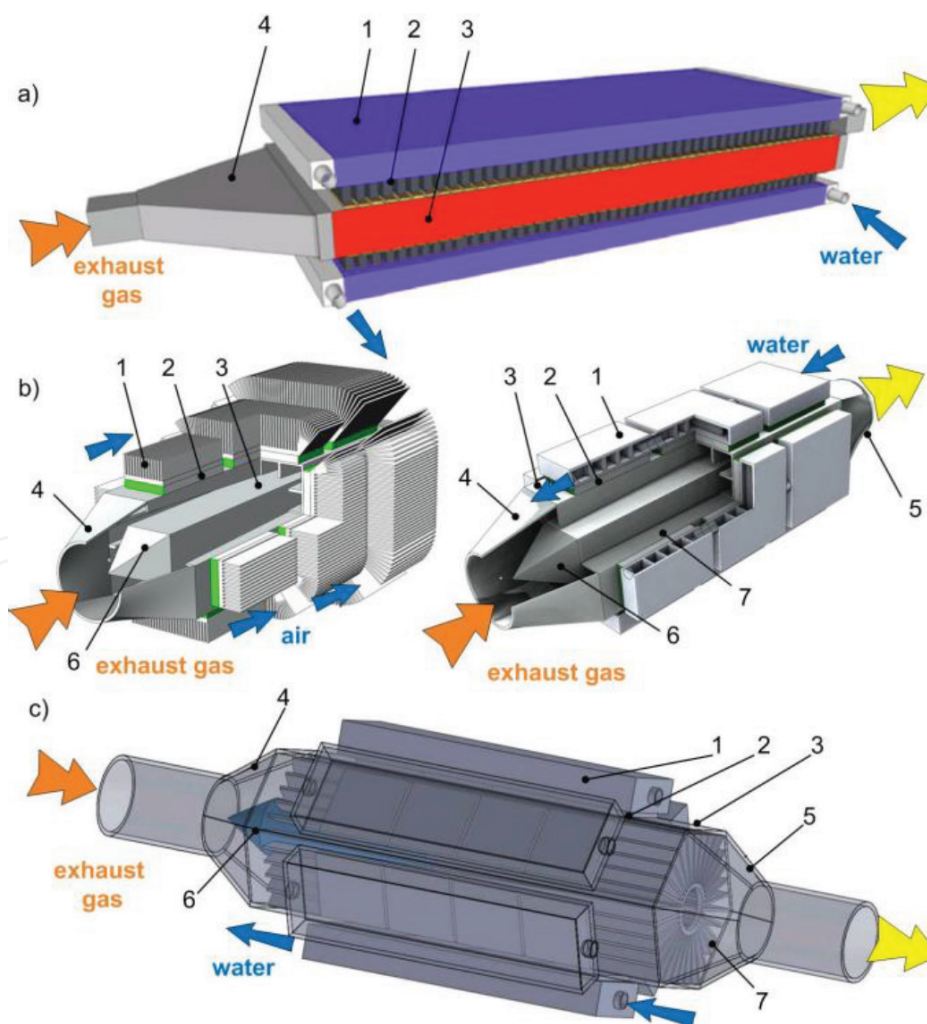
Constructions with flat walls of hot heat exchanger: (a) with two flat walls [31, 32]; (b) with four flat walls [28]; (c) with six walls [25, 33].
